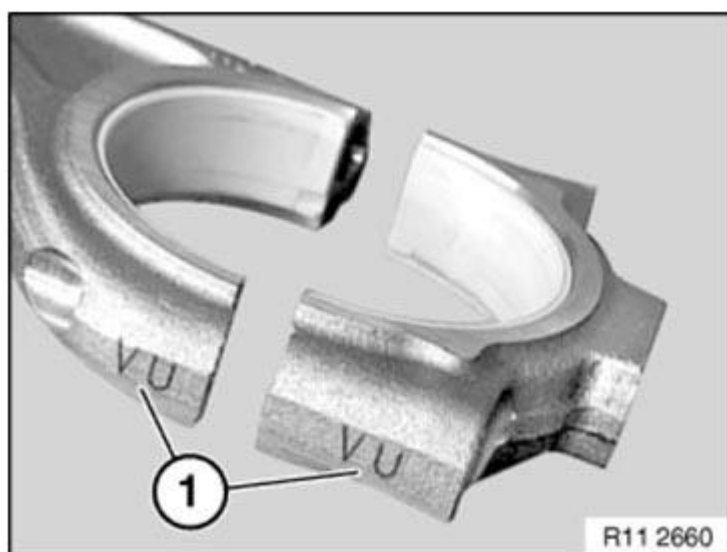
Identifying Conrods And Conrod Bearing Caps Pairing Letters
